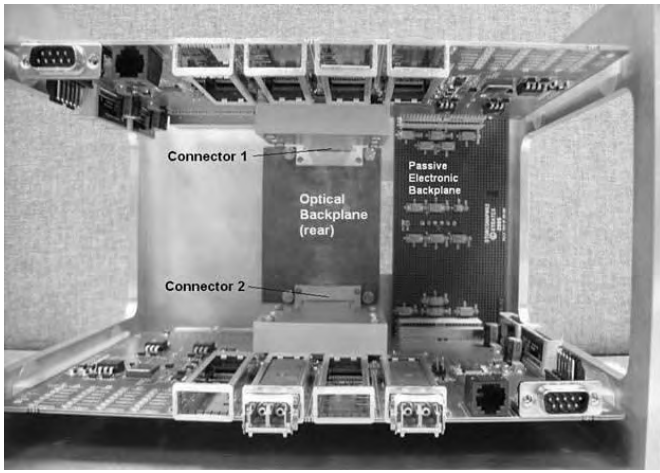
Demonstration assembly for pluggable optical backplane connection system
